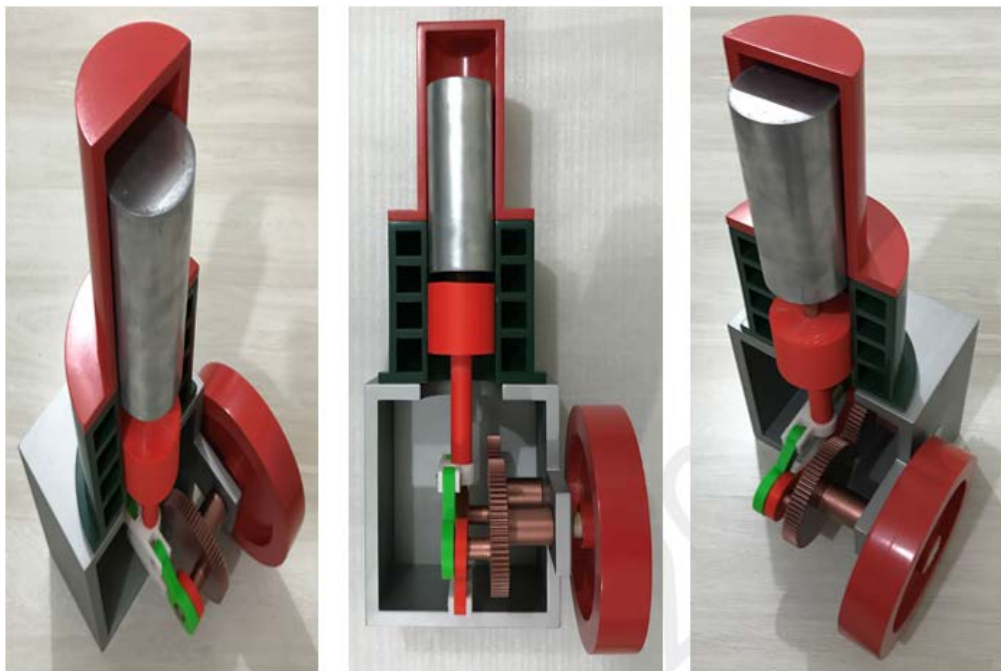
Assembly views of pre-prototype Stirling engine with rhombic drive mechanism
